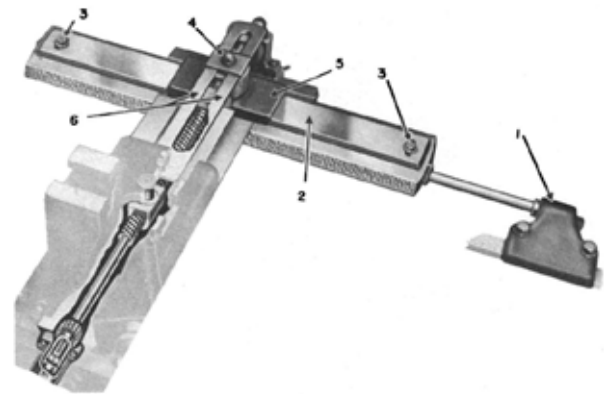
TELESCOPIC TAPER ATTACHMENT
